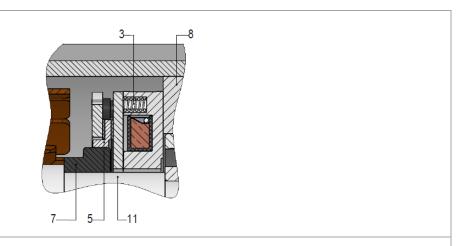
/1: Interference fit assembly of hub (7) and machine shaft (e.g. motor shaft) (11)
